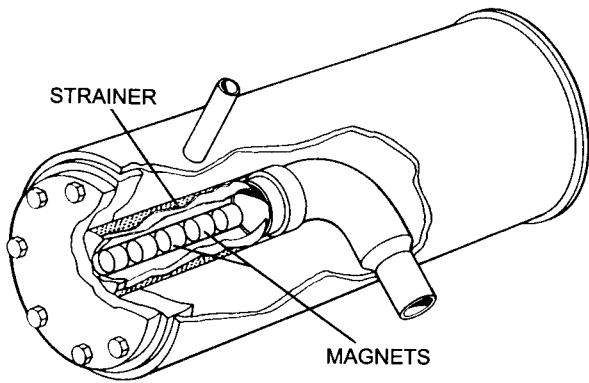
EXPLODED VIEW OF MOTOR COOLANT RESERVOIR
